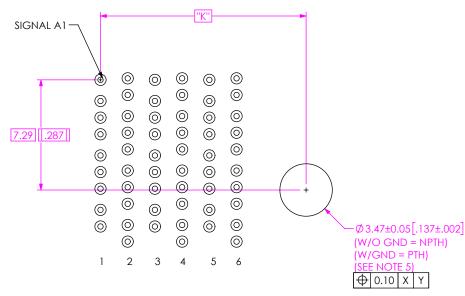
(STAND ALONE, RIGHT PCB MOUNTED GUIDE PIN) (SAME AS FIG 1, EXCEPT AS SHOWN) С
